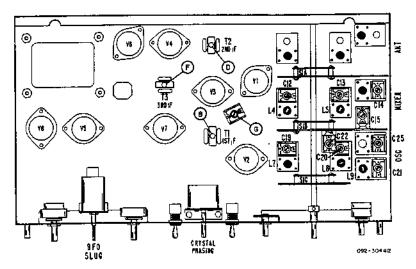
Battam View Chassis Tube Locations And Alignment Points
